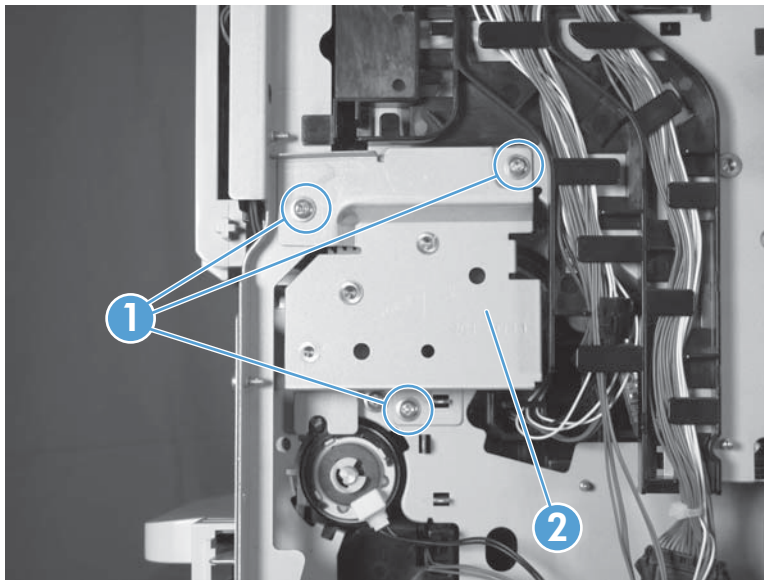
Remove the upper cassette pickup assembly (4 of 4)
